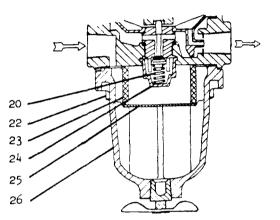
PARTIAL ASSEMBLY OF AF-2 TYPE SHOWING ADDITIONAL PARTS IN FILTER ASSEMBLY.
